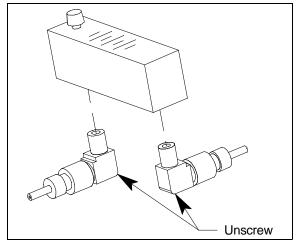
H₂S Dilution Air Flowmeter Fitting Removal
